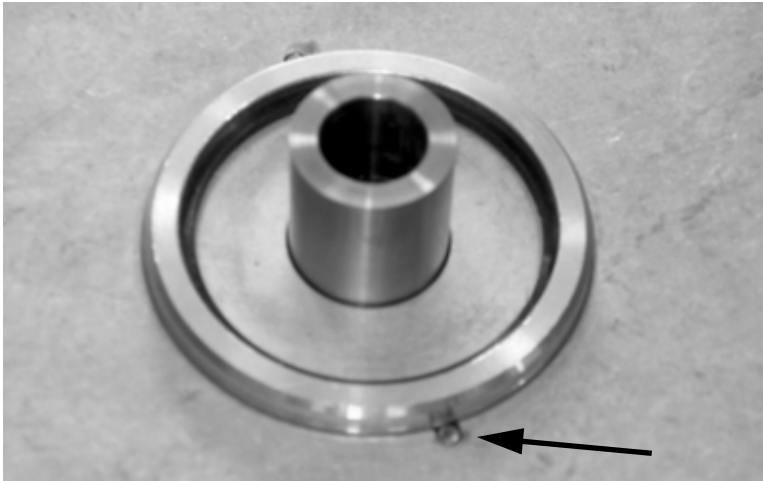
Make sure the shaft keys are in the slots on both side plates of the wheel.
